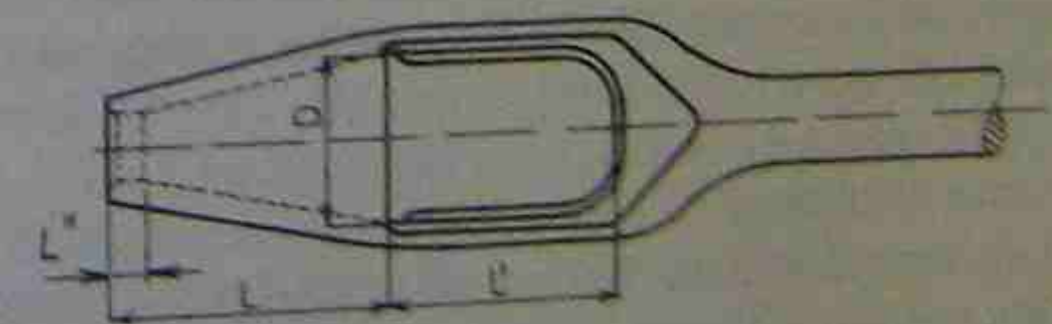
Tapered babbitted rope socket and shackle rod in one piece.
